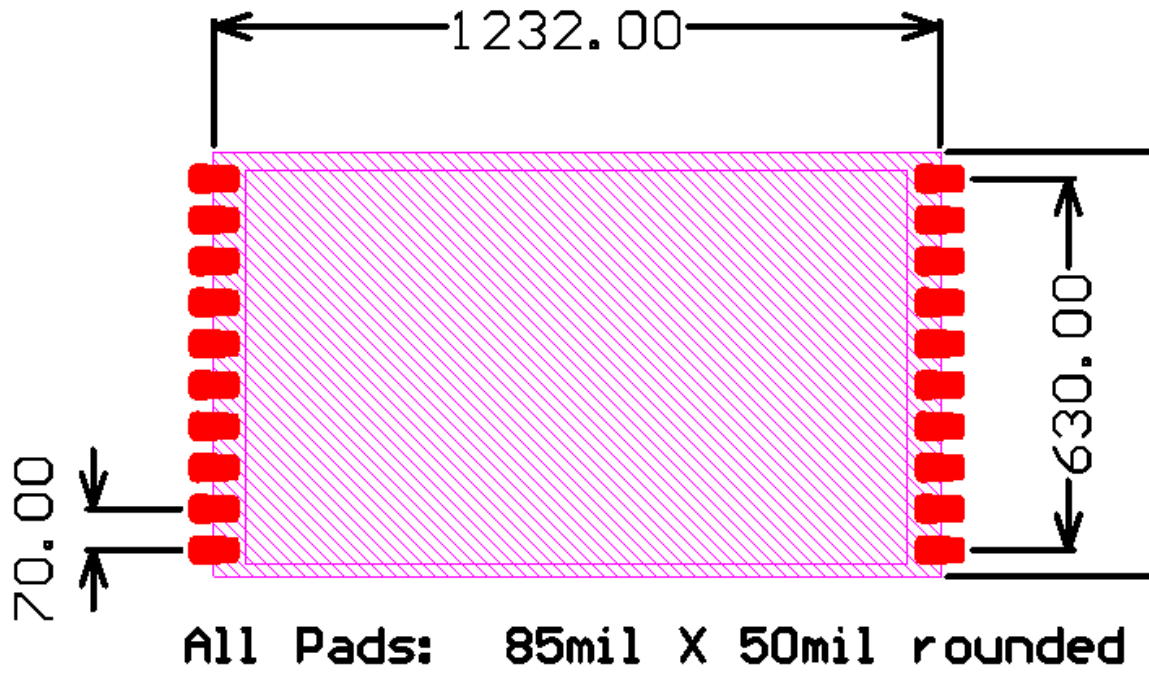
AIM4 PCB Land Pattern, all dimensions in mils
